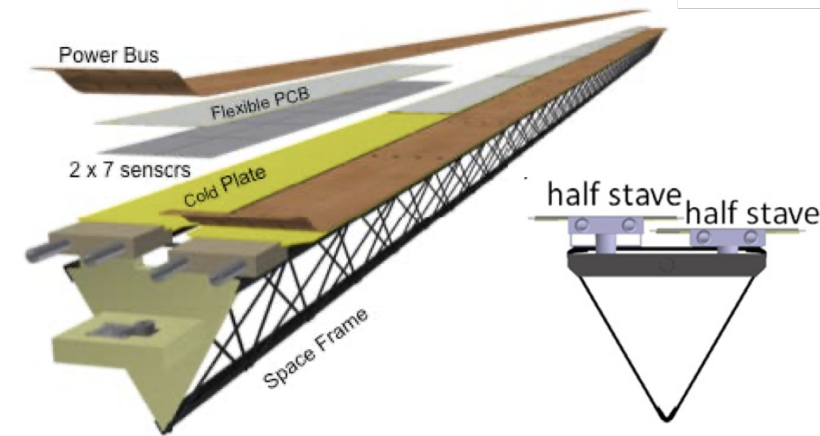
Schematic exploded view and cross section of the OB Stave.
